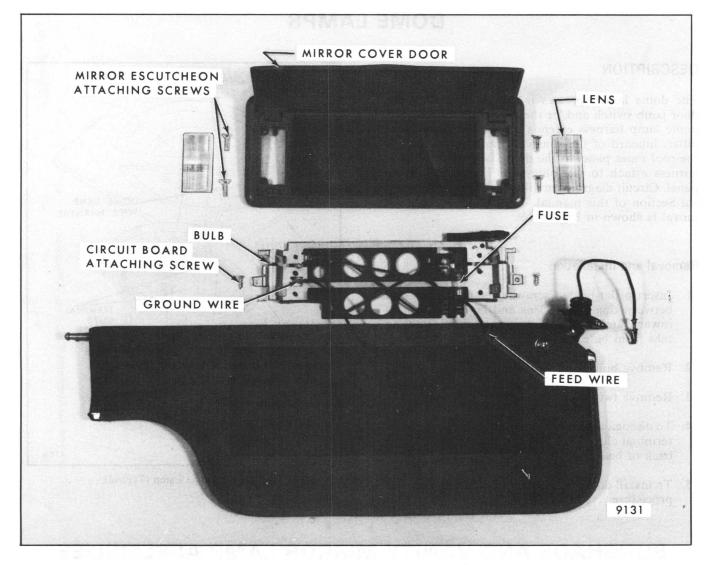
Vanity Mirror and Lamp Assembly
